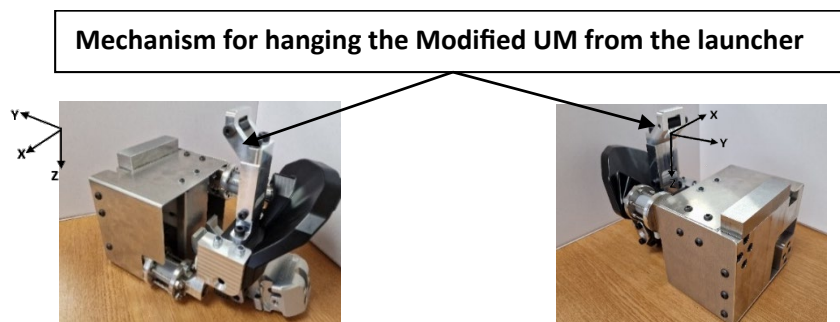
Assembly of prototype-1 (flesh component is not attached)
